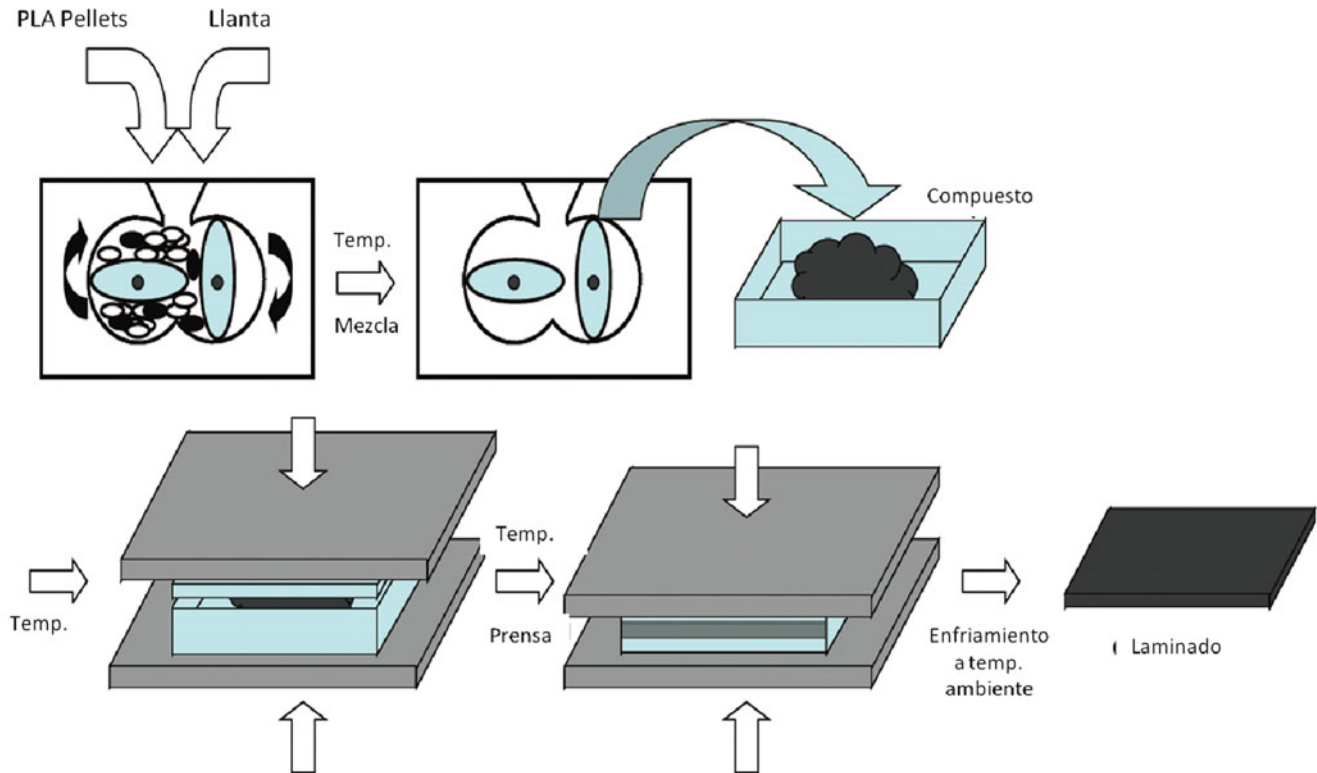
Schematic drawing of blending of the composite and lamination
